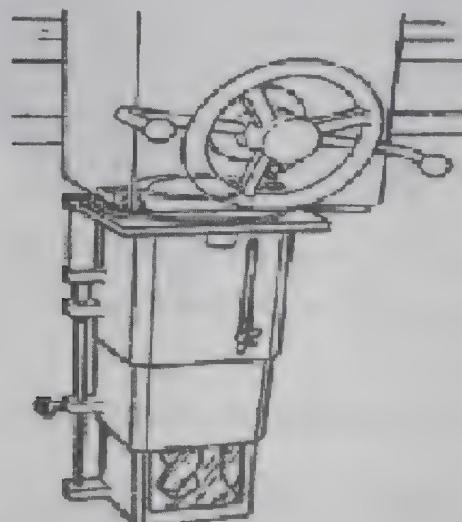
Example of an adjustable guard for a radial or pedestal drilling machine
